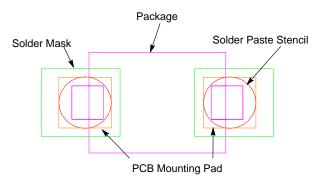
Package shown on Recommended Mounting Pattern including Stencil
